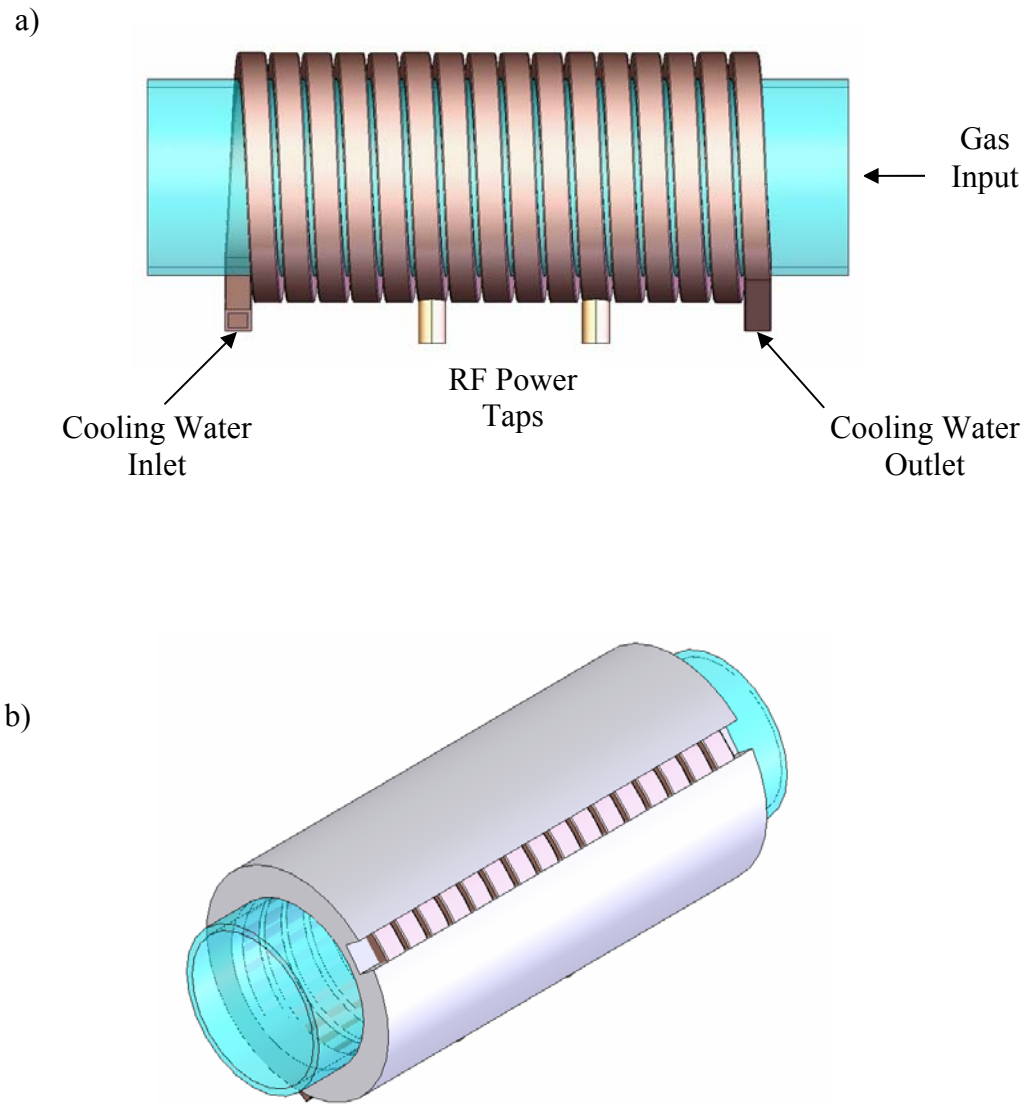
a) Side view illustration of the chamber with the encapsulant removed for clarity. The gas flow direction and power connections are shown. b) The chamber section isometric view with a section of the encapsulant removed to expose the coolant coil.
